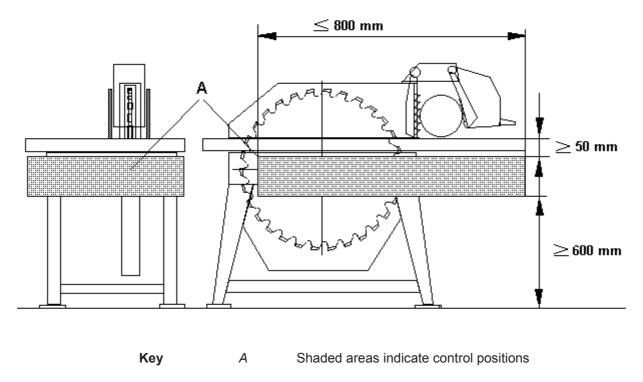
Position of controls on a circular sawing machine for firewood with sliding table
